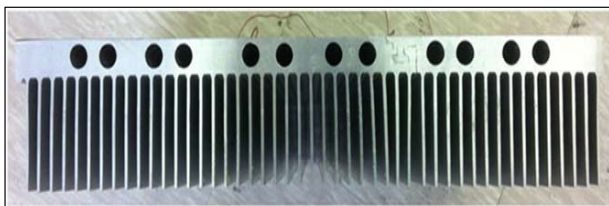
Front view of the heat sink showing 12 flow holes in base
